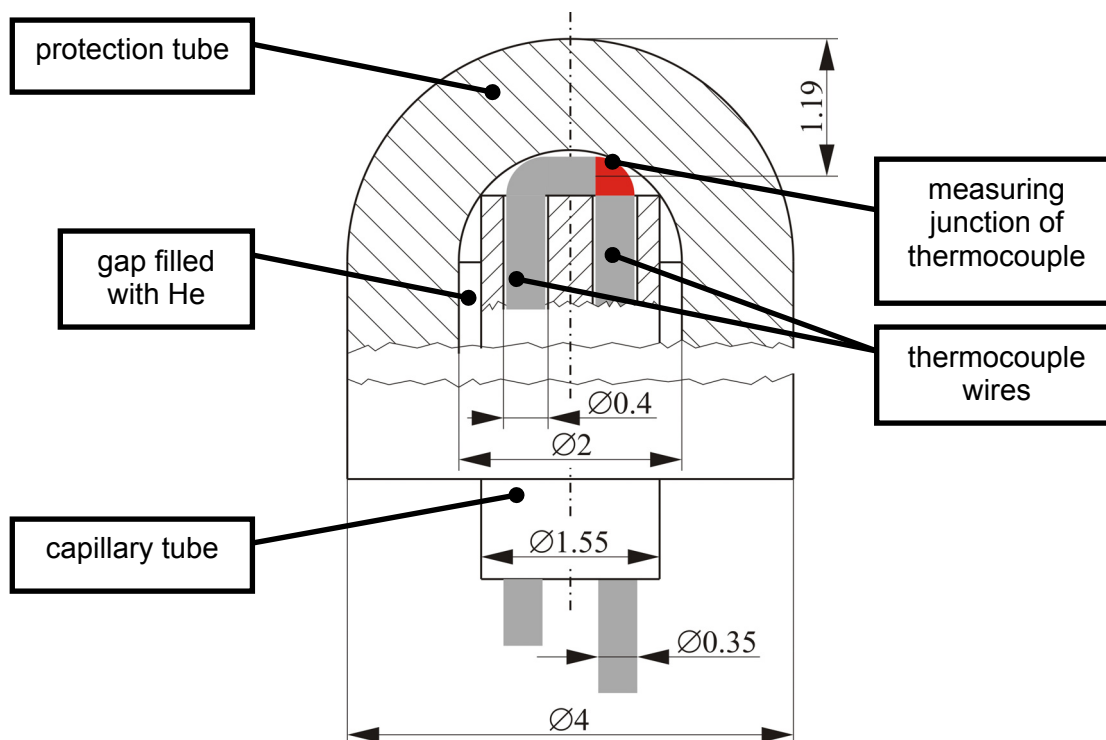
Assembly of the self-made thermocouple employed for temperature measurement inside the tube reactor (dimensions in mm)
